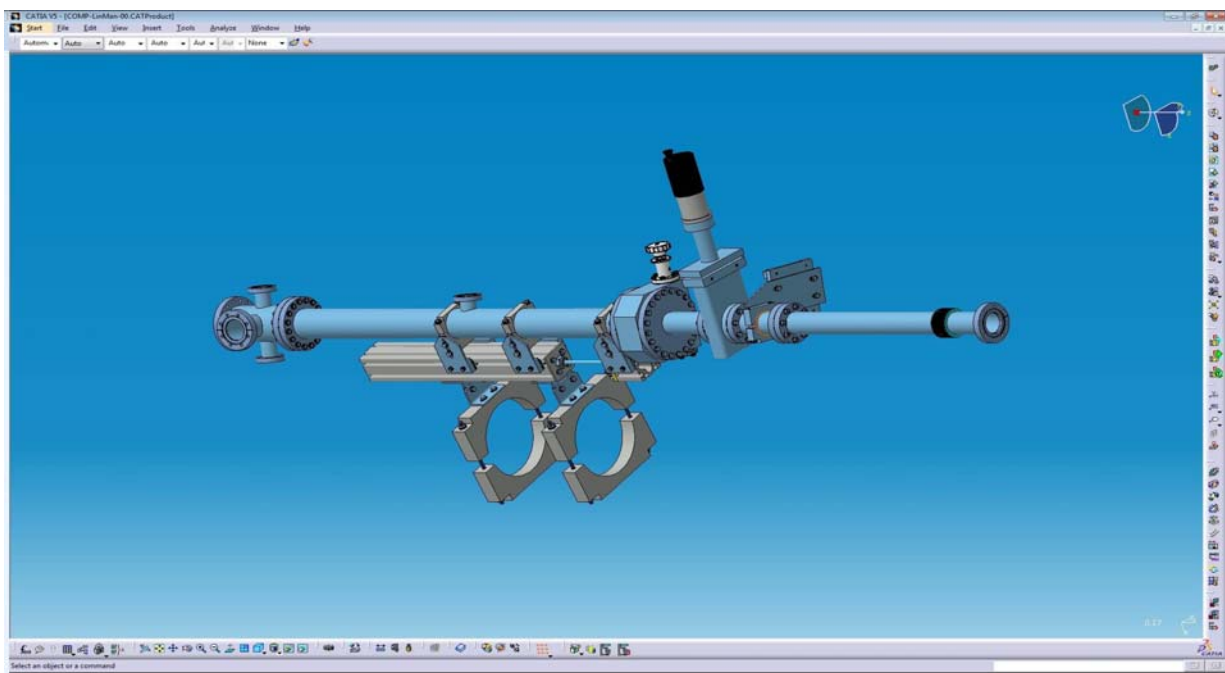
CATIA(c) drawing of the double-valve+manipulator design for COMPASS. This system will allow insertion of objects like probes, samples, etc... in the COMPASS divertor without breaking the vacuum
